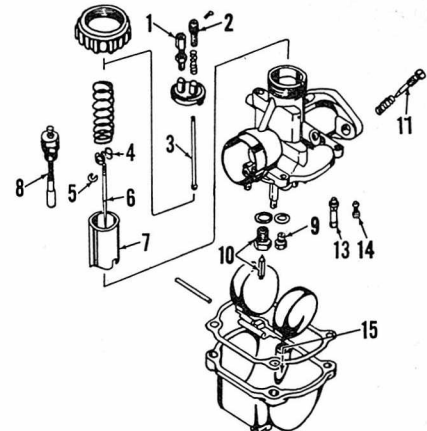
Exploded view of Mikuni VM carburetor typical of type used.
